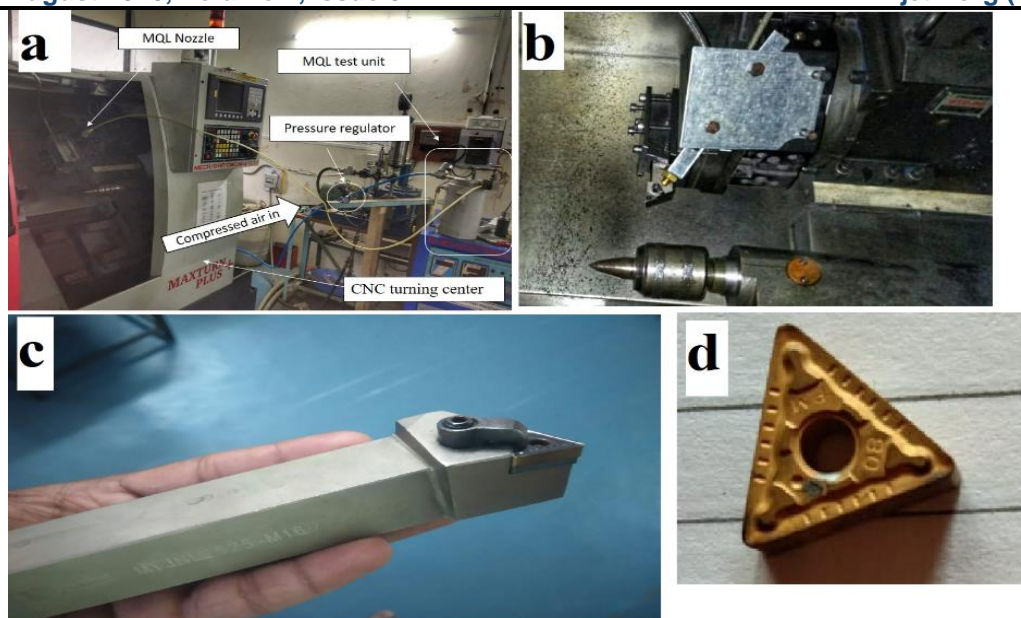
(a) Experimental set up (b) Nozzle arrangement (c) Tool holder (d) Cutting tool insert
